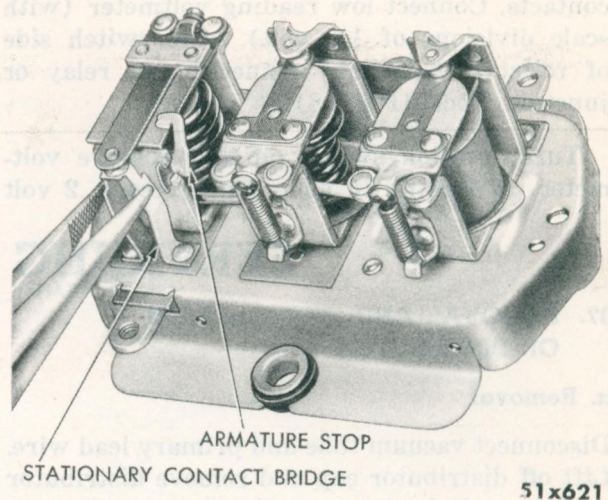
Adjusting Cut-Out Relay Contact Clearance
